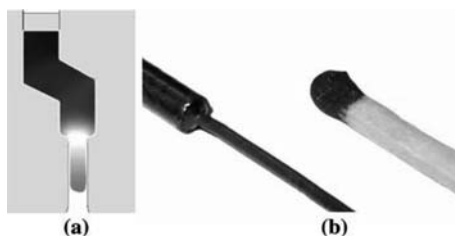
Combined ECAP/extrusion process: (a) schematic die design and (b) Al alloy specimen that underwent integrated two-step ECAP + extrusion processing (a match is shown to indicate the size scale; from [4]).
